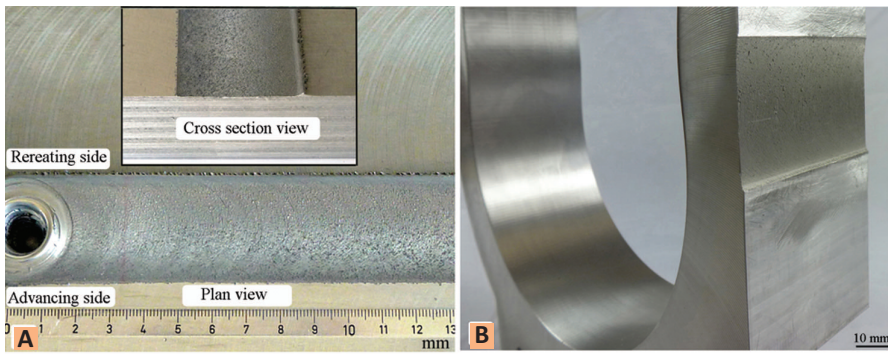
A — Macrostructure of the joint after FSW; B — geometry of rotary engine housing after grinding and cleaning.
